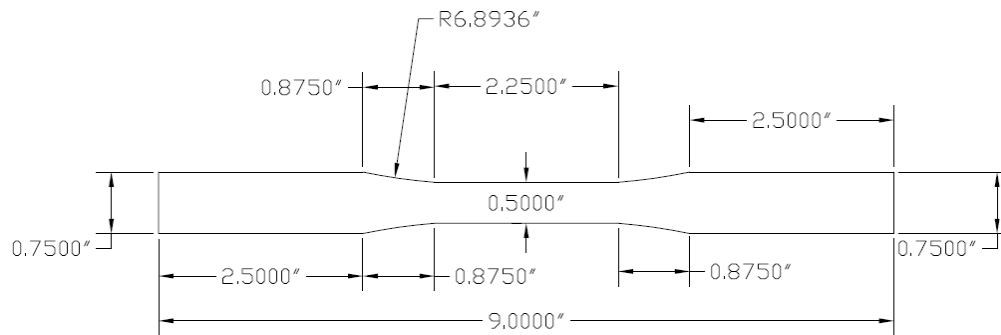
Dimensions chosen for test coupon for the uniaxial tensile tests
